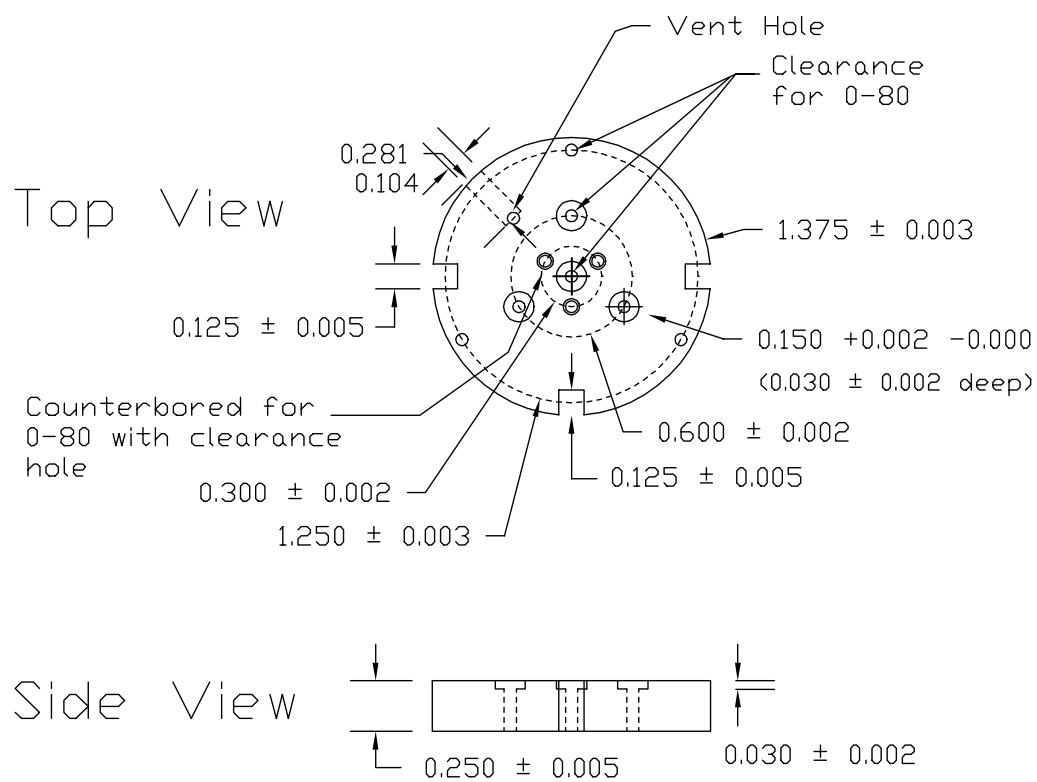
STM molybdenum base plate. All dimensions are in inches.
